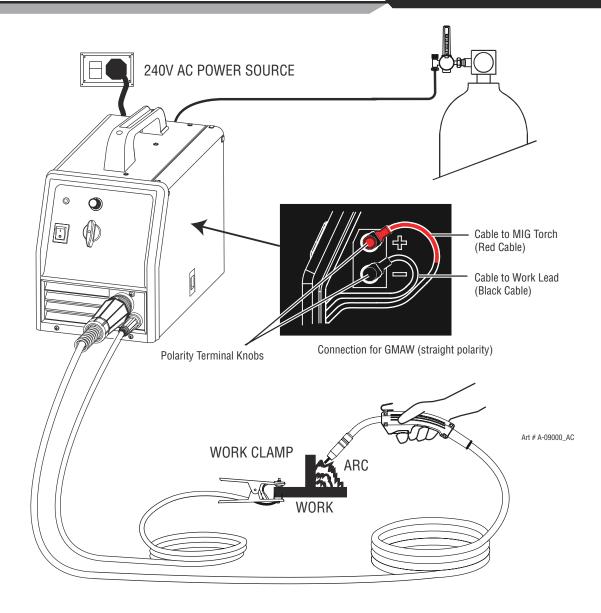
Gas Shielded Set-up for WeldSkill 150 Mig
